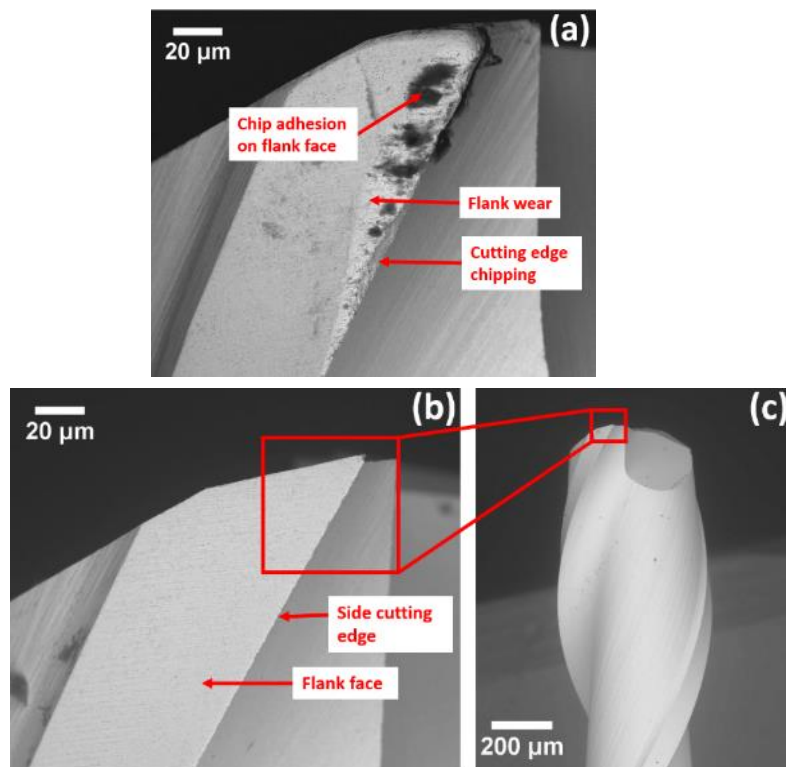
Side view of SEM micrograph for (a) worn tool (Tool #1); (b) & (c) new tool (uncoated endmill).
